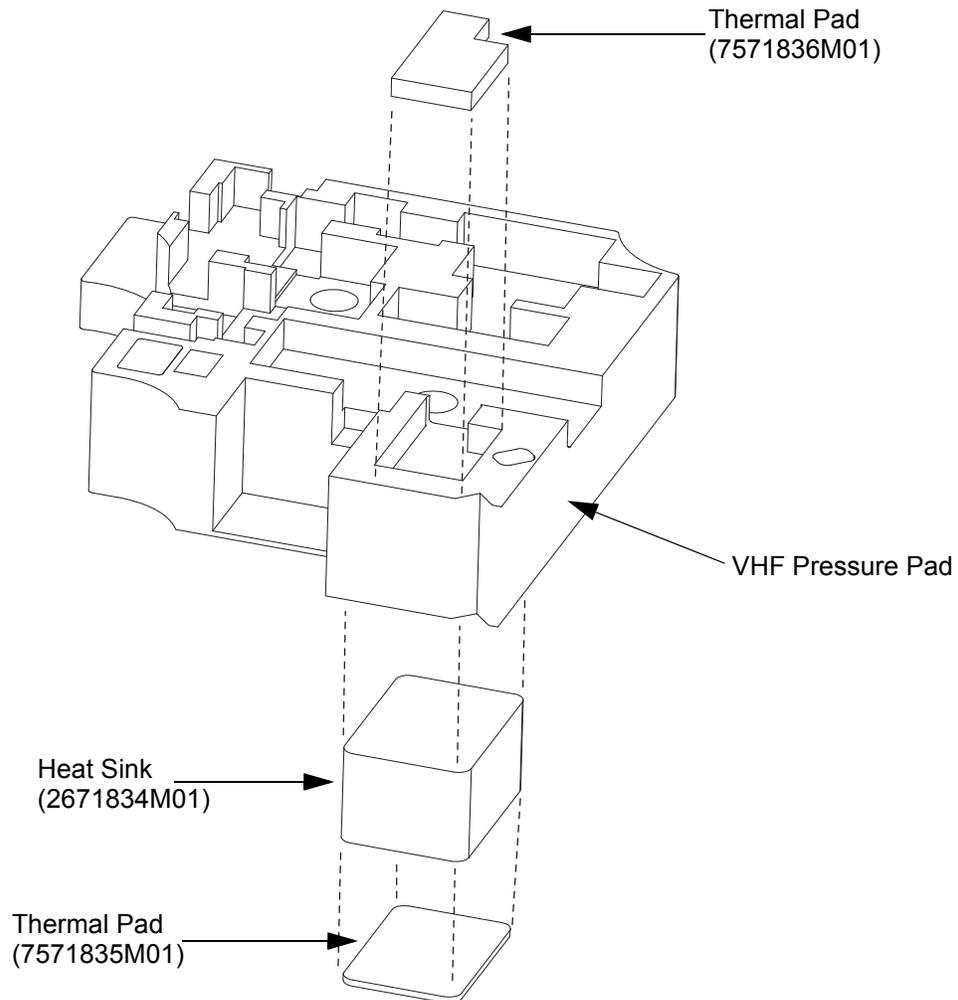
Assembling of PA Heat Sink System (VHF 8 MB Brick)
